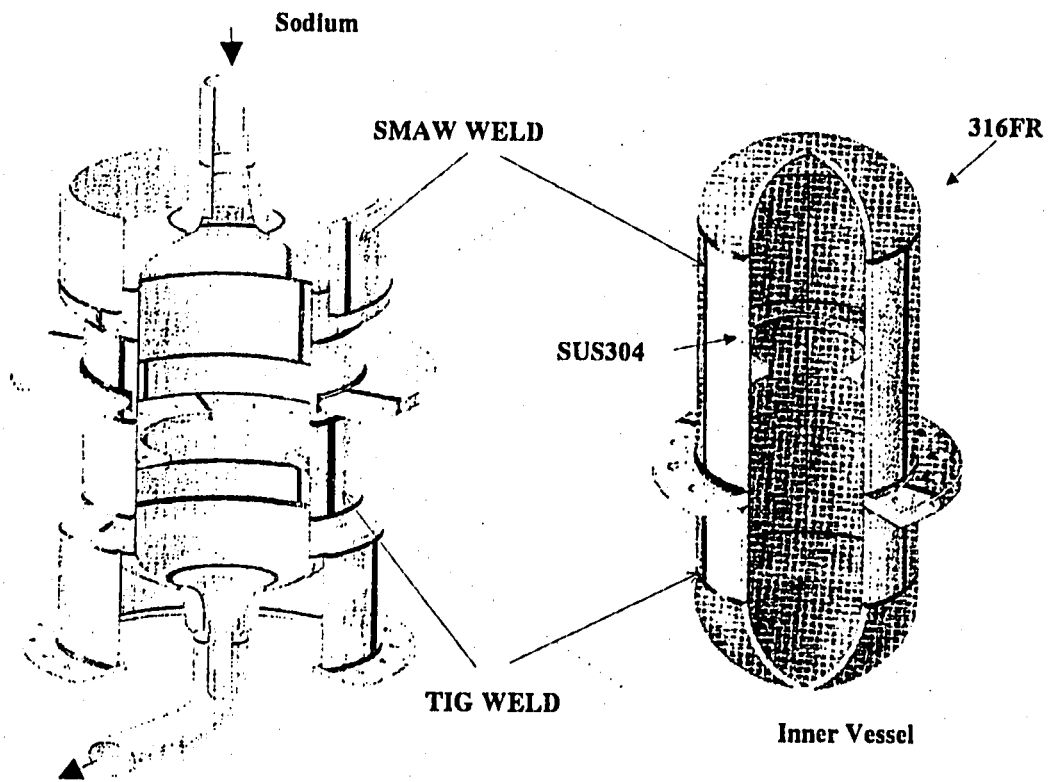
Welded Joints in the Welded Vessel Model
